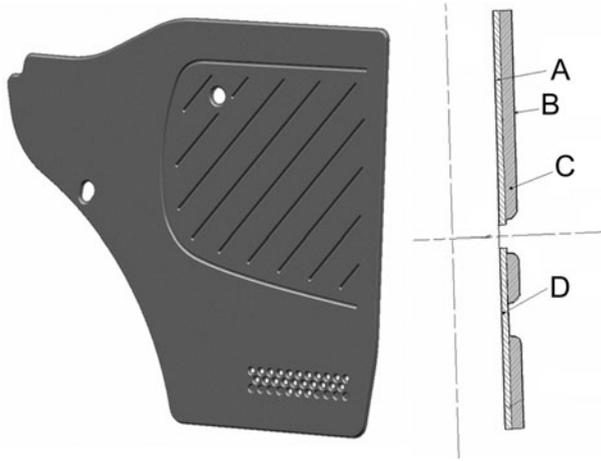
Outline of a flat door panel: A and B laminated PVC, C wadding slab, D support.
